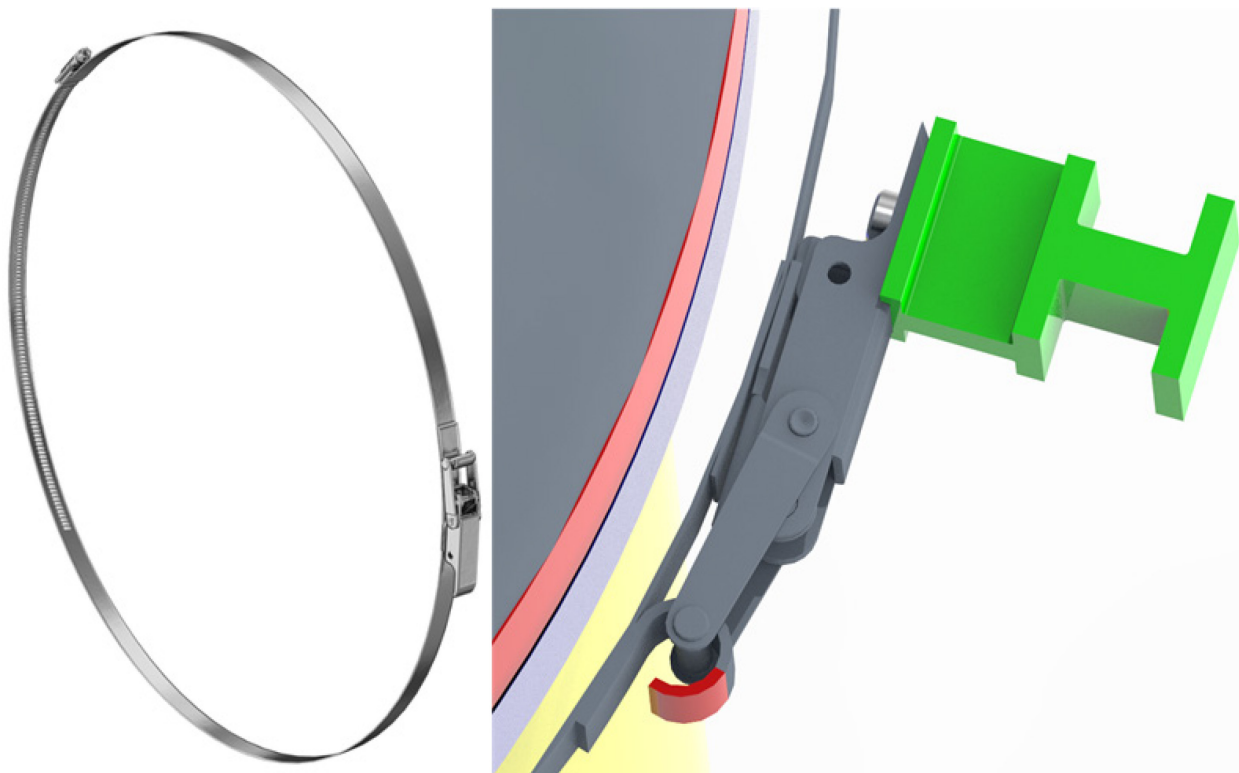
Duct Clamp - Left: unmodified duct clamp (McMaster-Carr P/N 5215K33); Right: Modified latch and telemanipulator handle
